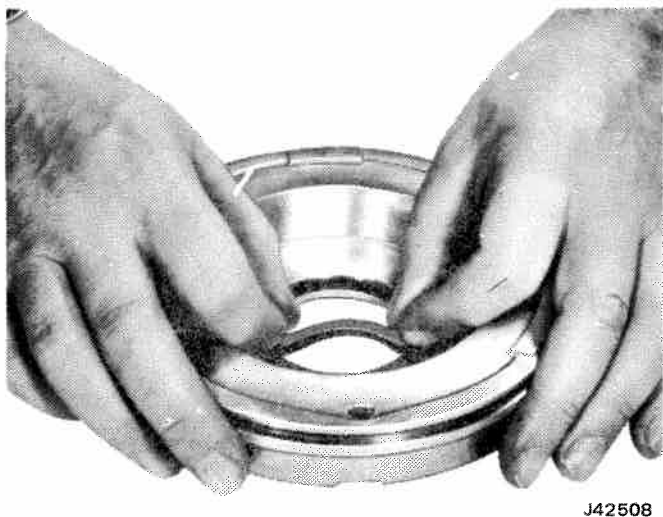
Installing Inner Seal on Direct Clutch Piston
